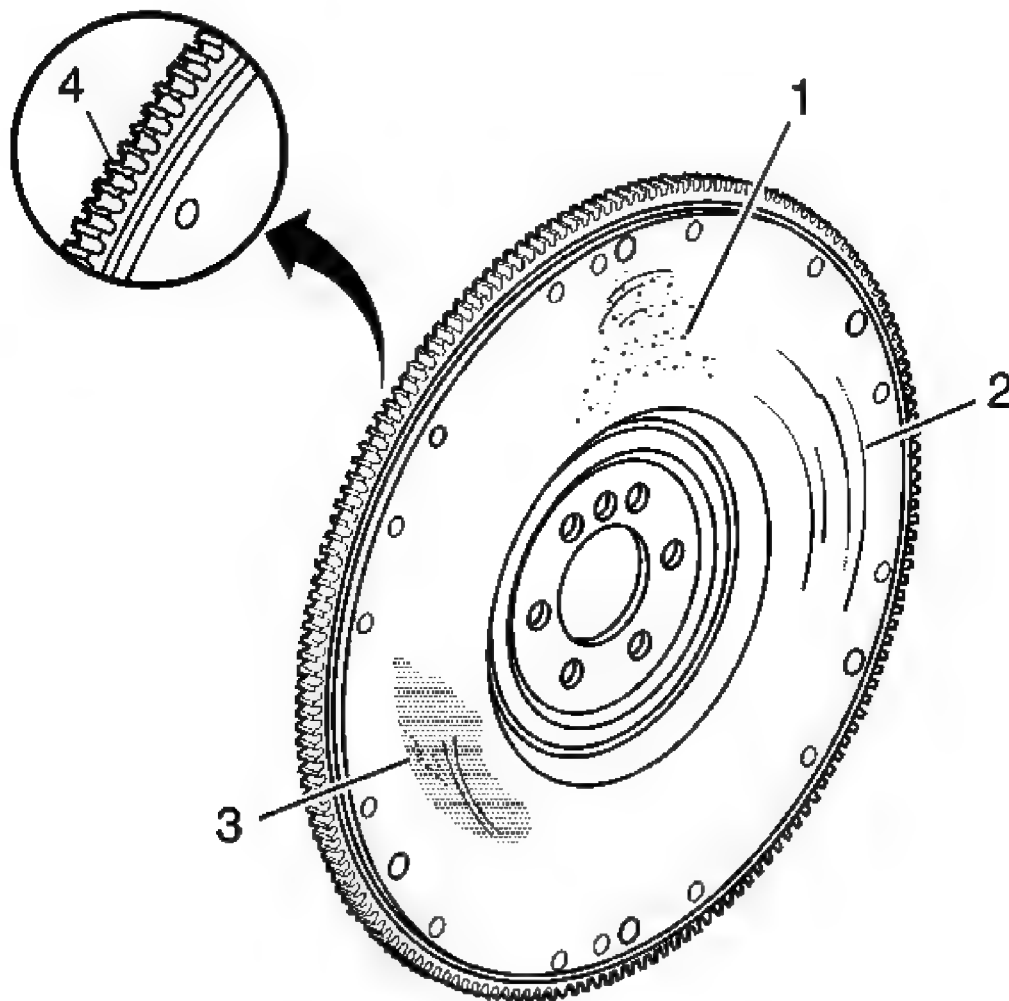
Locating Flywheel Inspection Areas (Manual Transmission)
